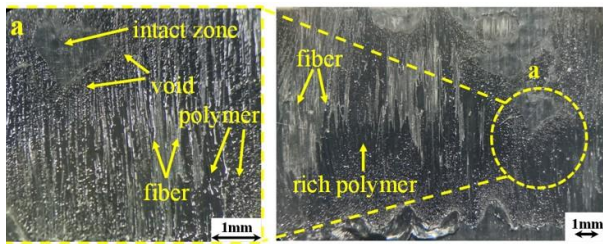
The optical microscope image of the fracture surface in Fig.10-b.
